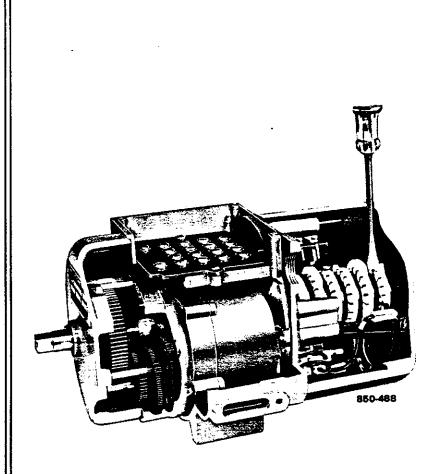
M640 cutaway view of internal parts. (Screwdriver blade shown in cam slot.)
